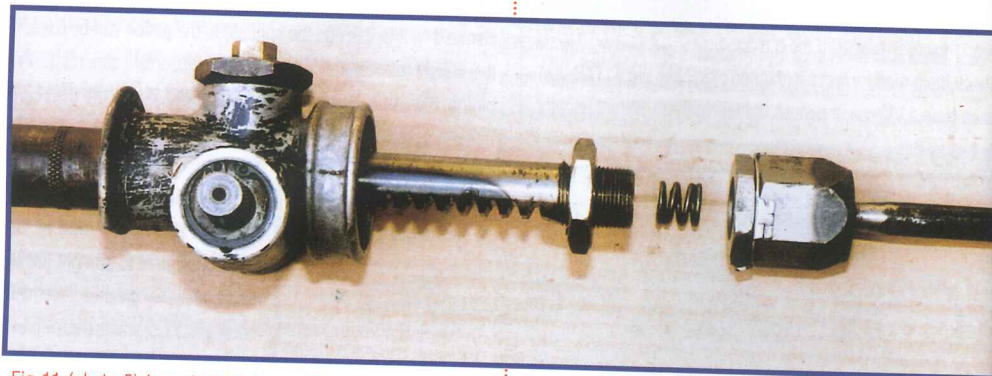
(photo 5) Inner ball joint assembly ready for fitment to rack. NB spring.
